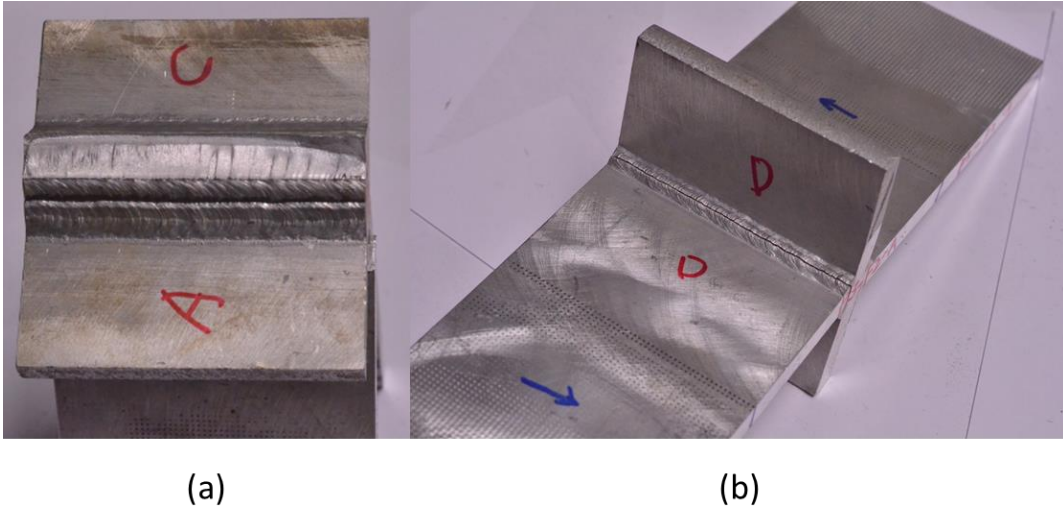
Representative failure modes observed from fatigue testing: (a) weld toe cracking (Mode A); (b) weld root cracking (Mode B)
